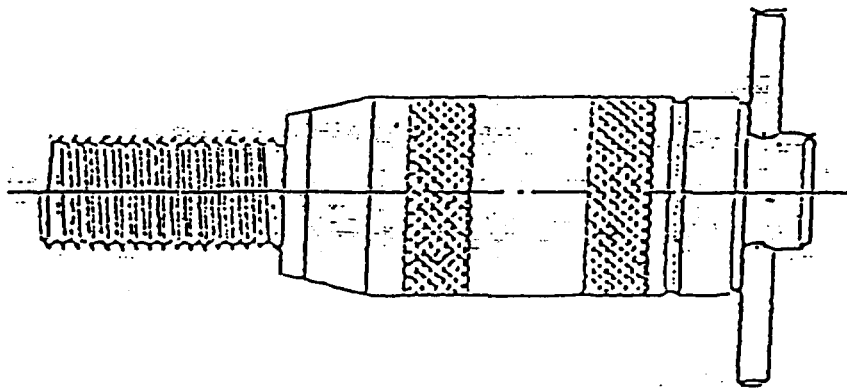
Type III, Class I, Style A, prewinder inserting tools, with threaded mandrel for spark plug threads
